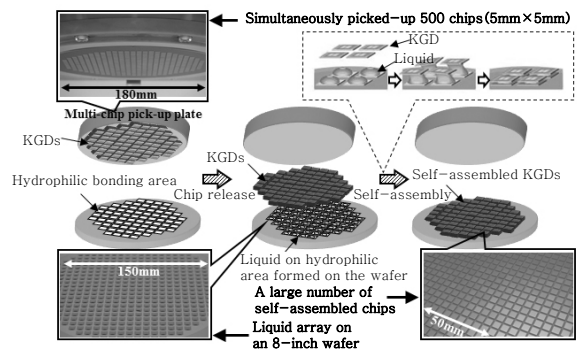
Multichips self-assembly of 500 chips using 8-inch self-assembly bonder
